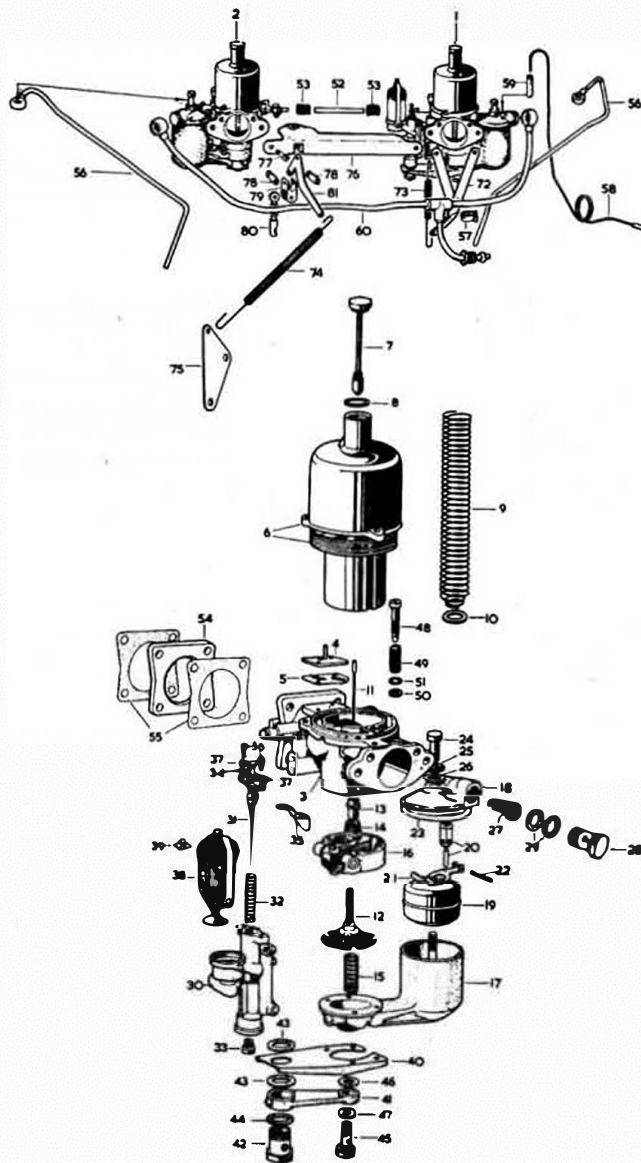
THE S.U. HD.6 CARBURETTOR (FRONT)
